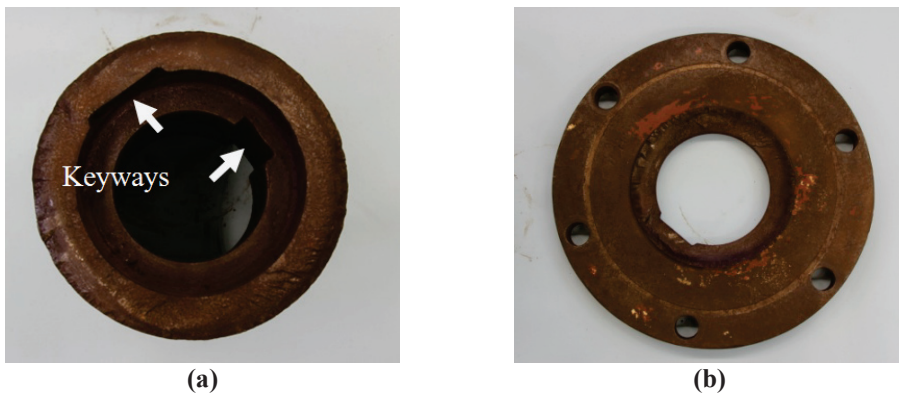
The shaft coupling disassembled to (a) cylindrical and (b) flange parts.
